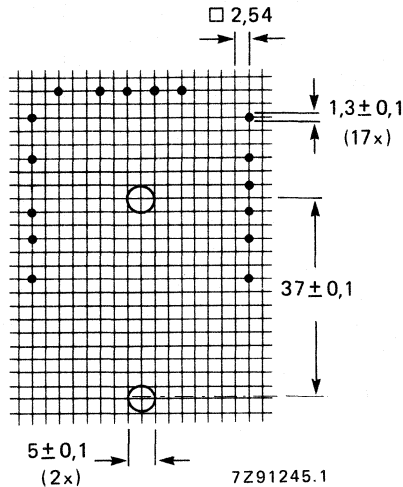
Hole pattern for mounting on a printed-wiring board (solder side).
